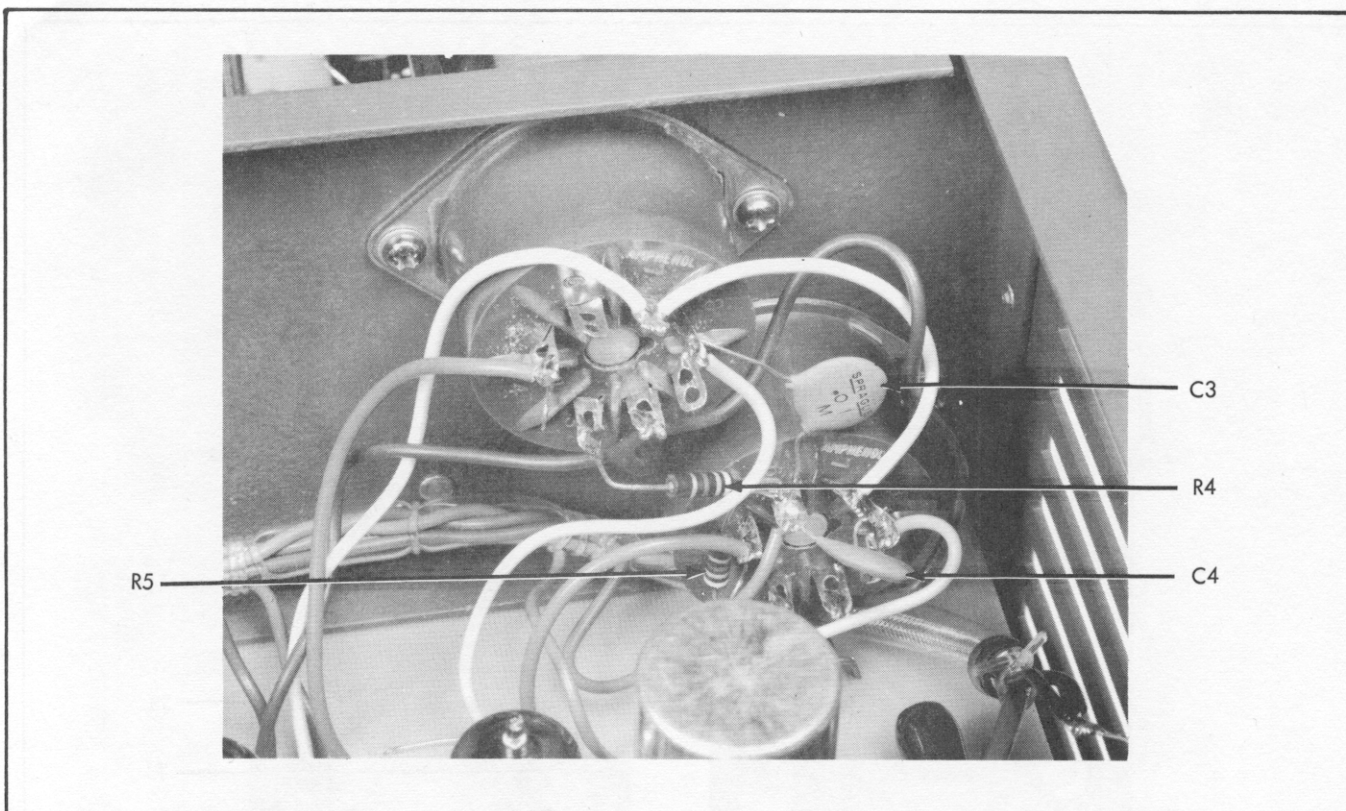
FINAL ASSEMBLY (sheet 2 of 2)
